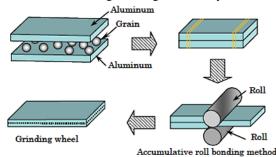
Schematic illustration of process of aluminumbond grinding wheel for ELID grinding using accumulative roll bonding method ref [10] is taken from internet
